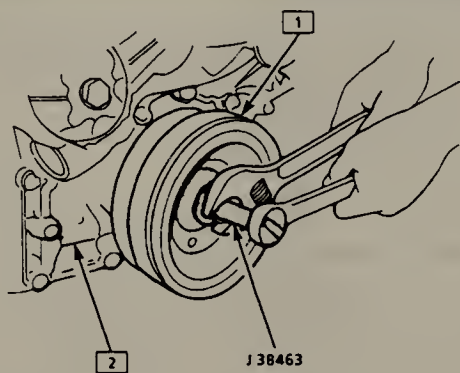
You MUST use the proper type of puller when removing the damper from the crankshaft
